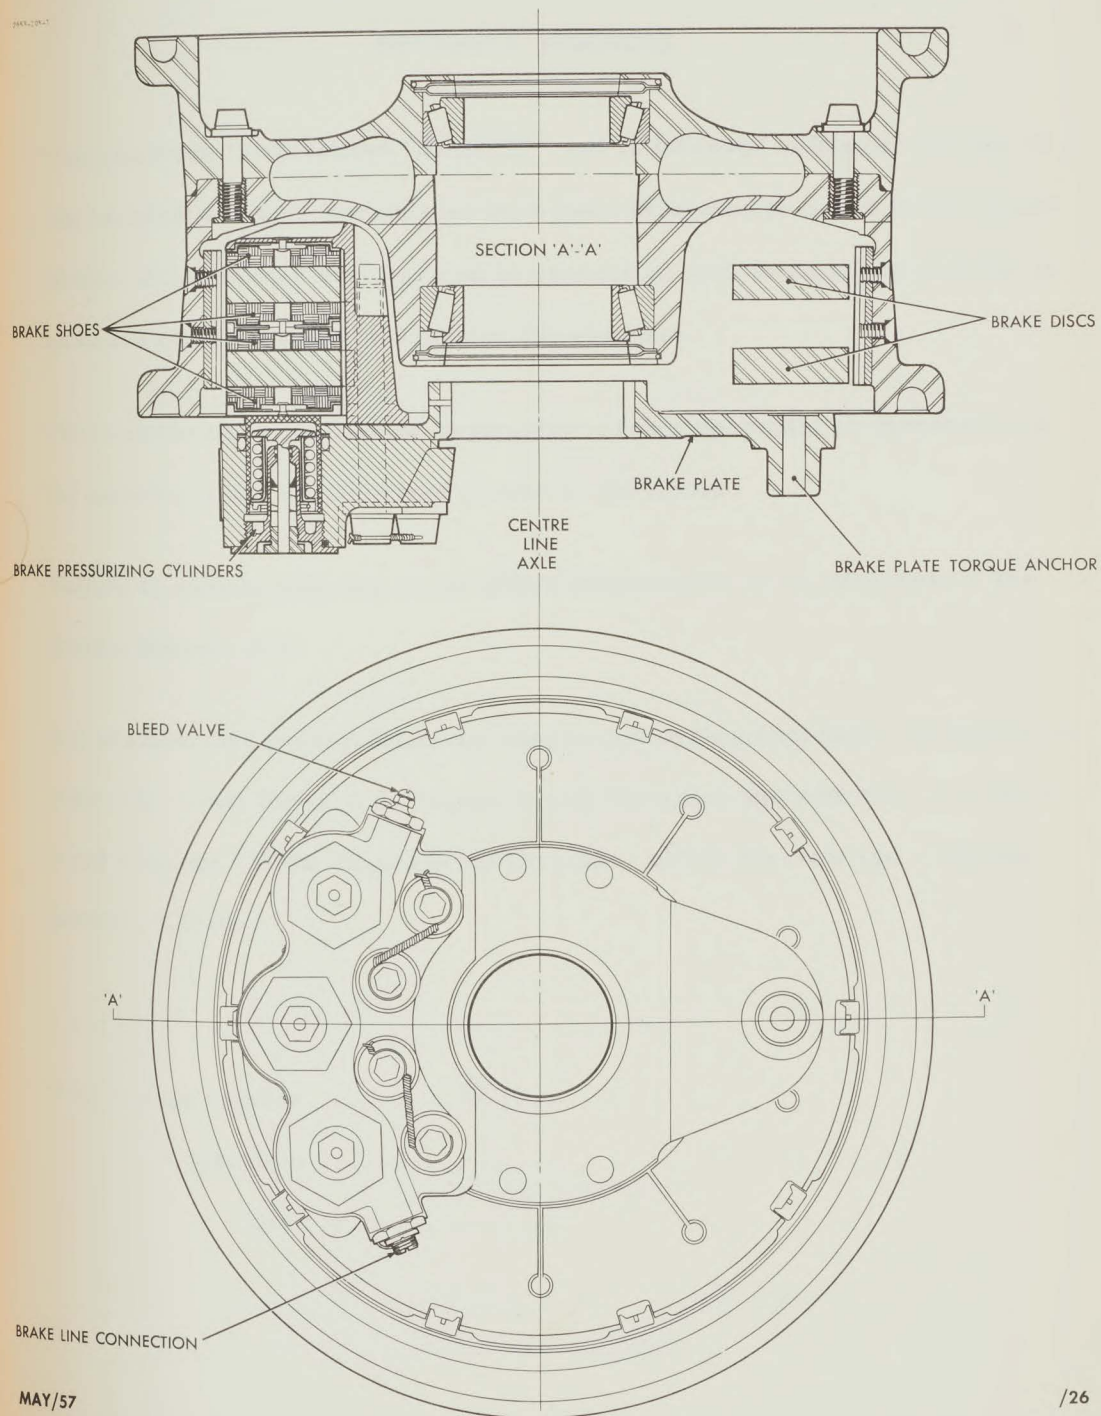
WHEEL BRAKE ASSEMBLY
